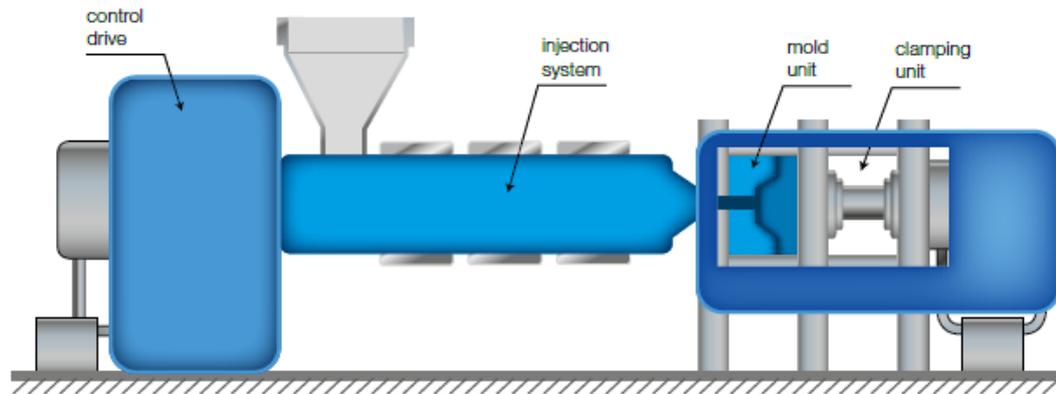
Thermoplastic injection molding machine 1 (Exxon Mobil, 2017)
